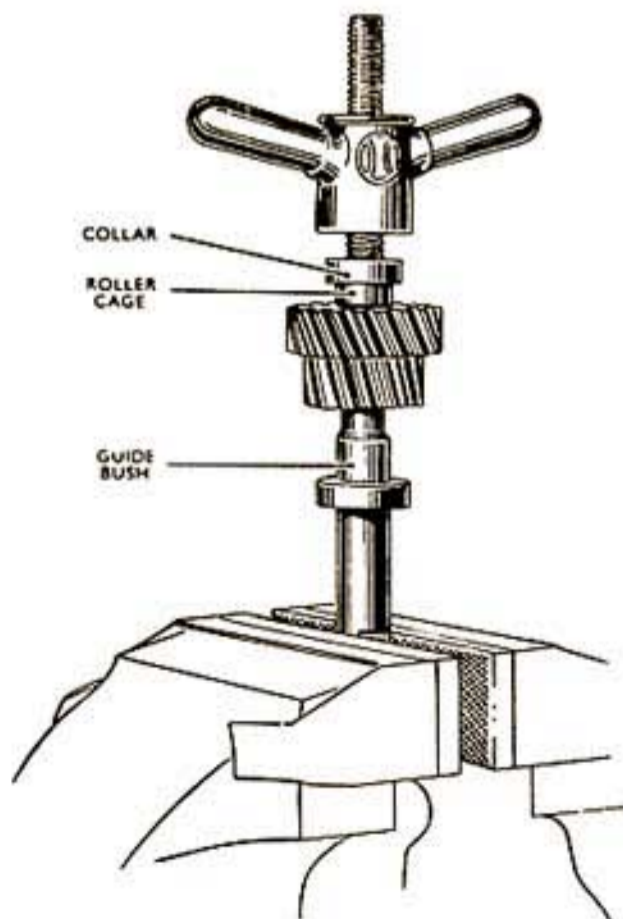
FITTING FIRST DRAWN CUP NEEDLE BEARING
